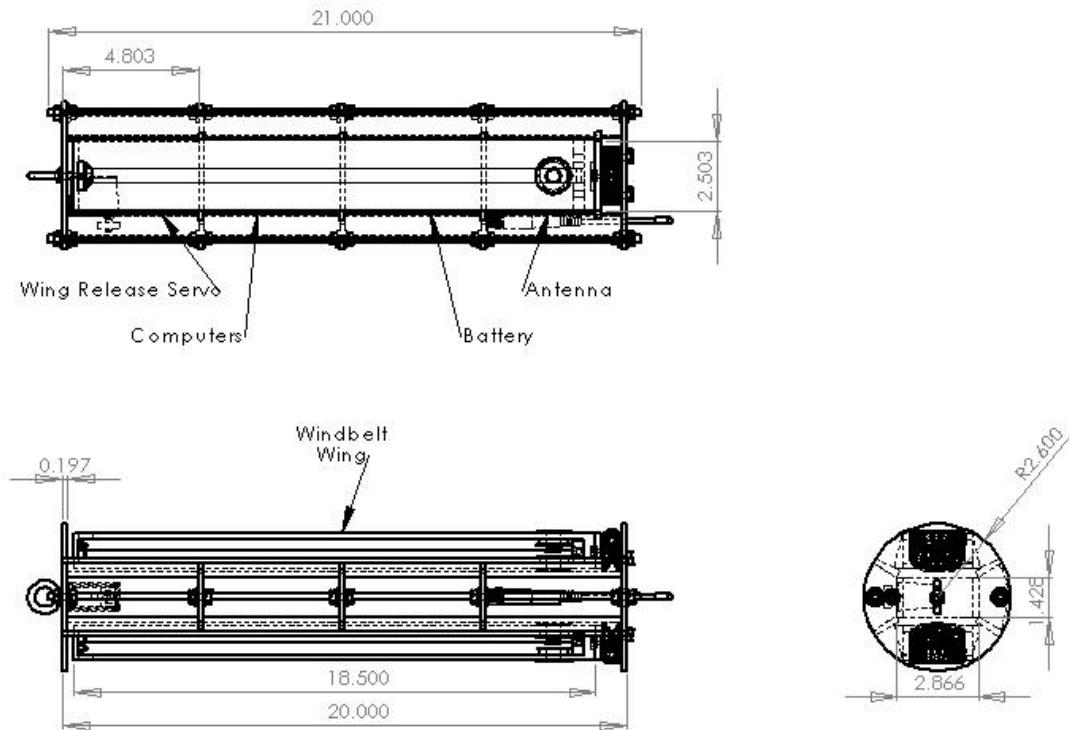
Selected Payload Design with deployable wings. All dimensions in inches.
